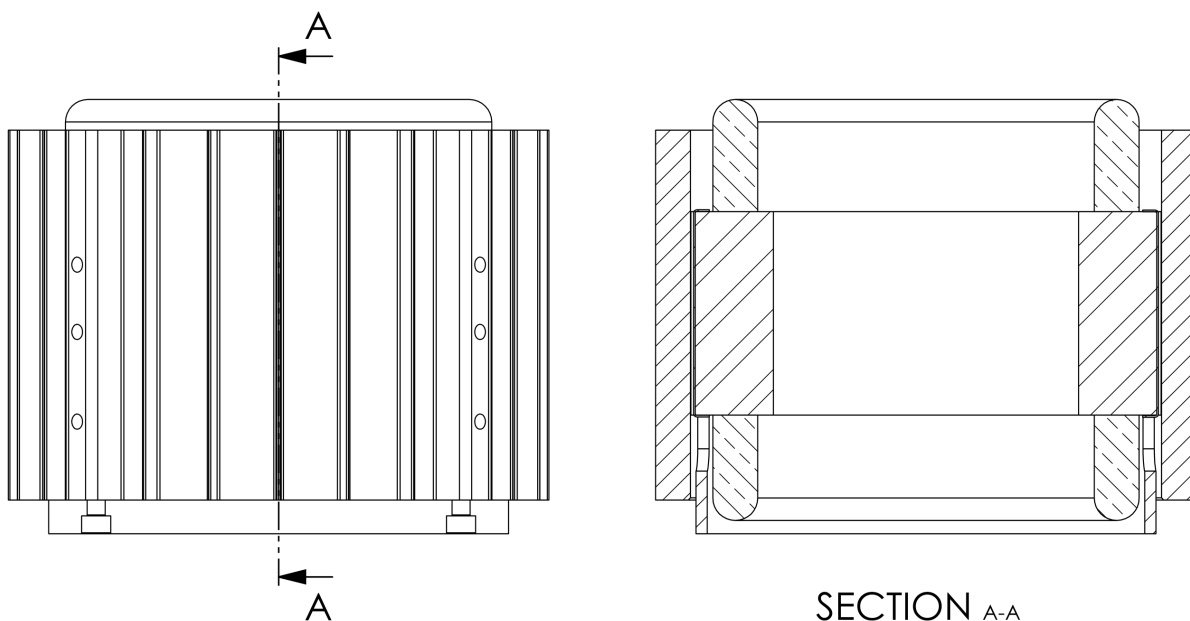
Height alignment of stator inside housing using a specially manufactured ring to support the stator
